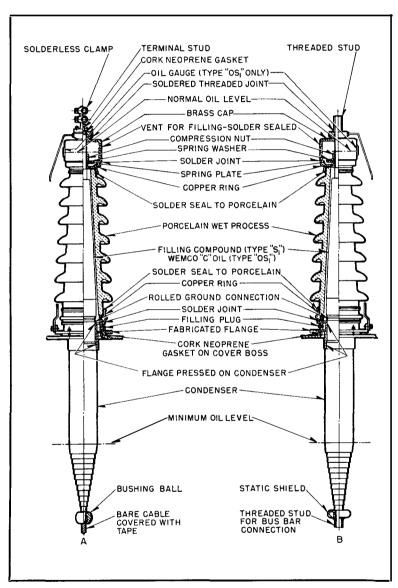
Sectional View—(A) Bushing with Fished-Through Cable;
